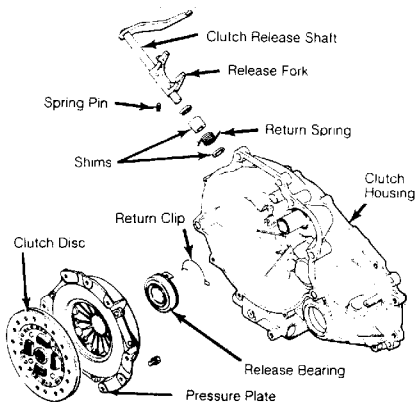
Exploded View Of Clutch Assembly (Typical)
